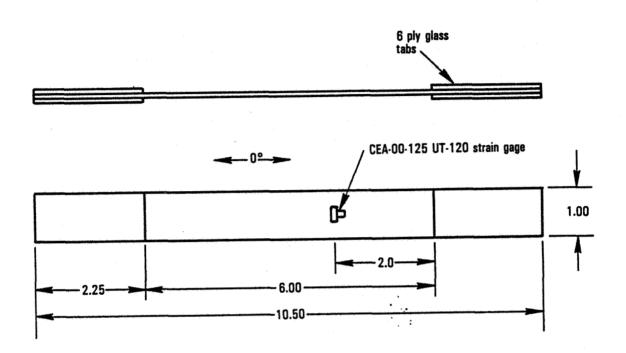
$\pm 45^{\circ}$ and 0° Tensile Test Specimen Geometry
